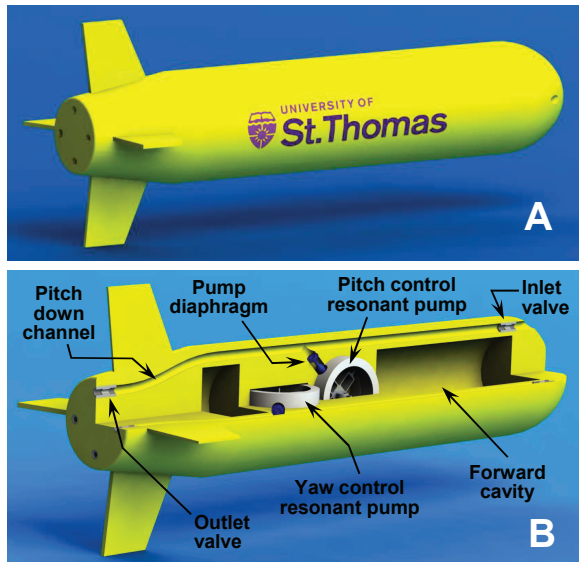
AUV design concept. (a) Fully assembled AUV. (b) Cross sectional view of the AUV showing the pitch and yaw resonant pump thrust mechanisms.
